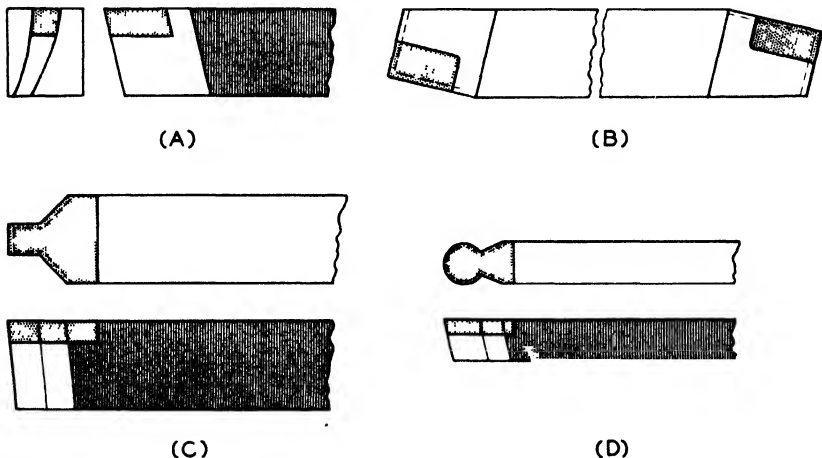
A Face Grooving Tool (A), the Double-End "Economy Tool" (B), a Special Grooving and Chamfering Tool (C), a Forming Tool for Turning, Filletting, and Facing Operations (D)
